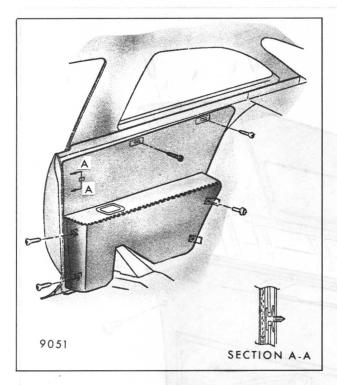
Quarter Lower Trim Assembly Attachment -Chevrolet "B" Two-Door Hardtop
